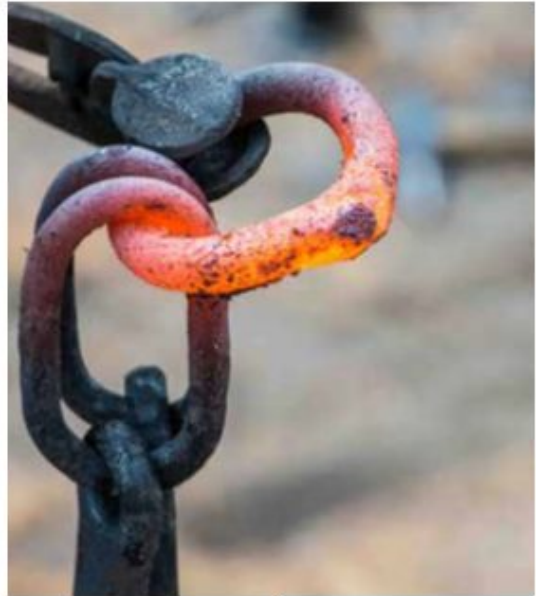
The centre ring after forge welding. Part of the challenge in welding the centre ring, is that you have to contend with the weight of the attached pins.
